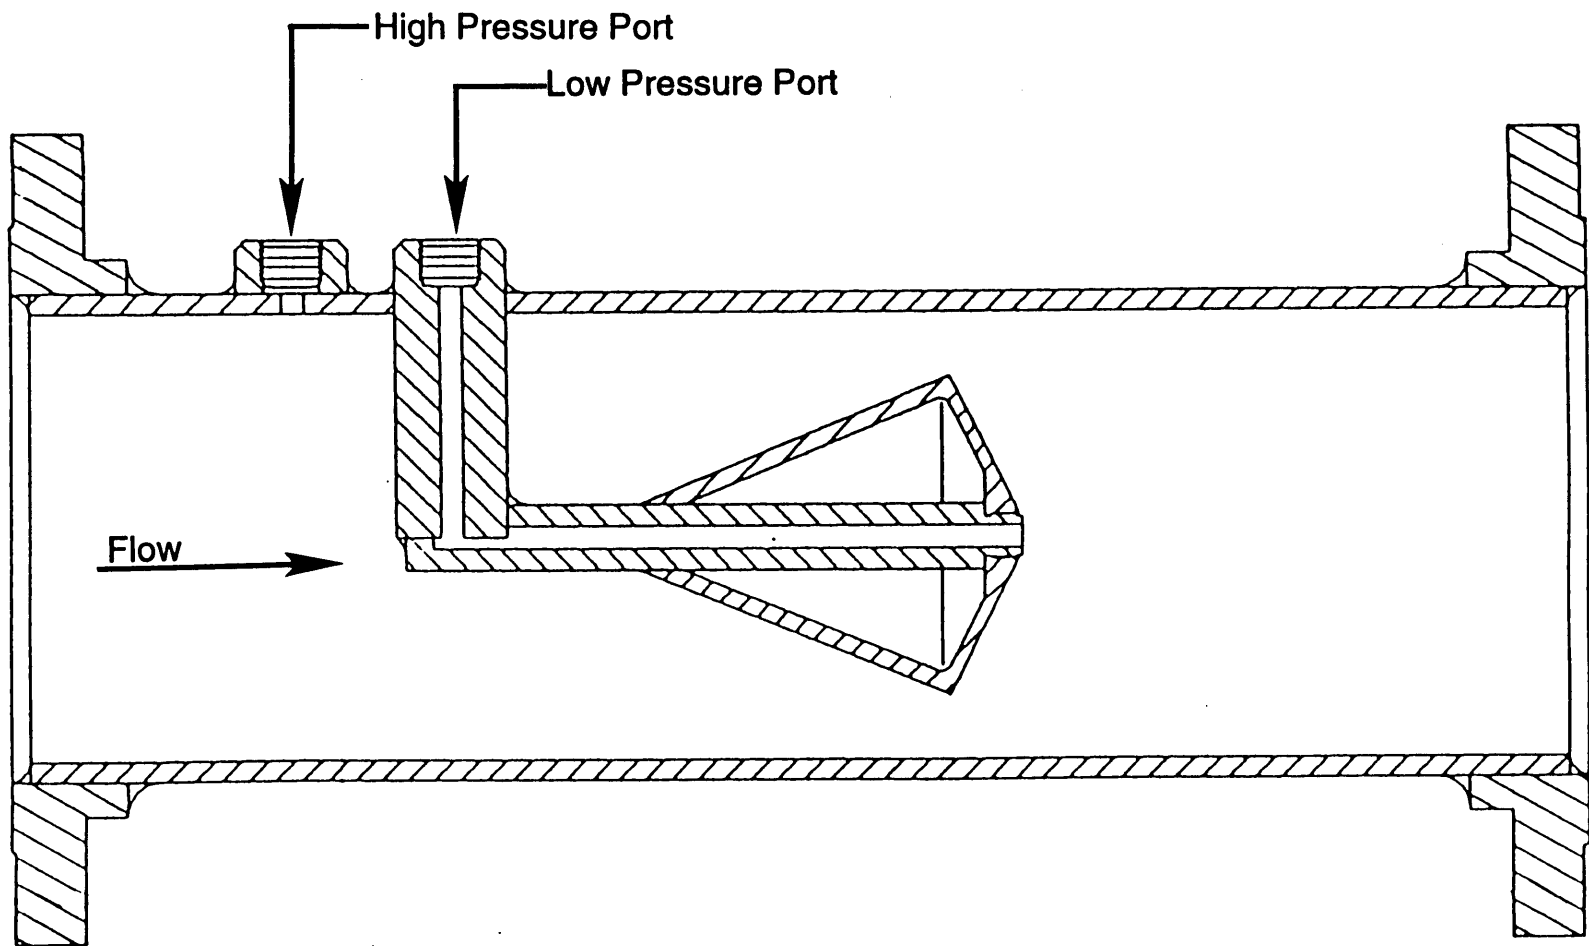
Cutaway Drawing of V-Cone Differential Pressure Flowmeter
